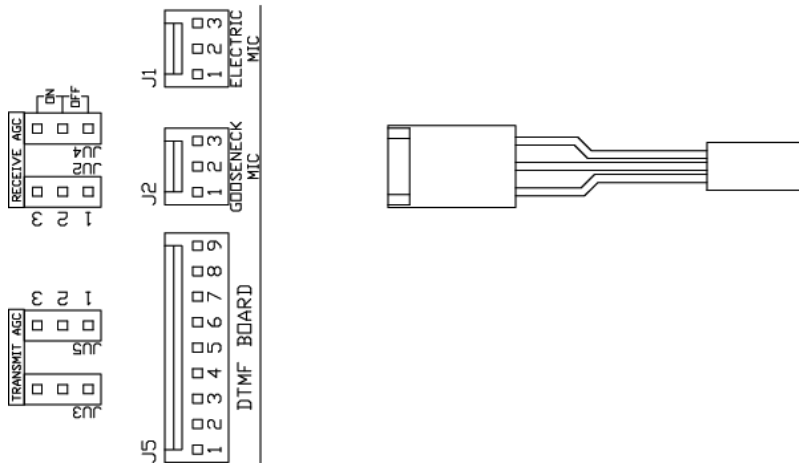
GOOSENECK ASSEMBLY INSTALLATION, CABLE DETAIL
